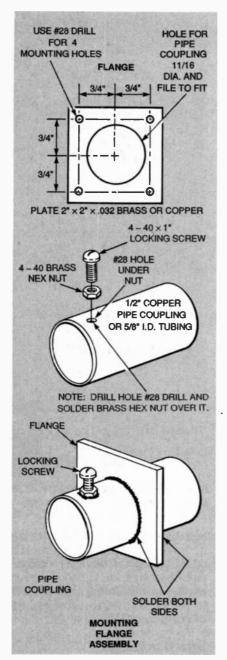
DETAILS AND DIMENSIONS for the mounting flange assembly.
